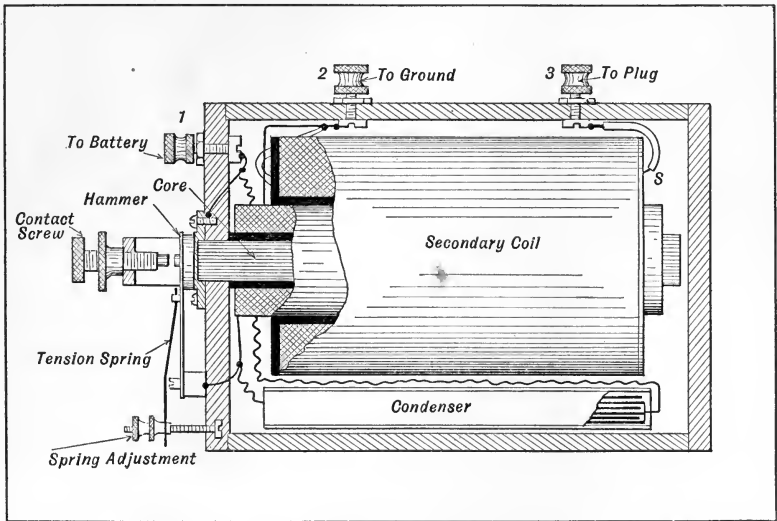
Part Sectional View of Simple Induction Coil, an Important Component of All Battery Ignition Groups and Sometimes Used with Magnetos.
